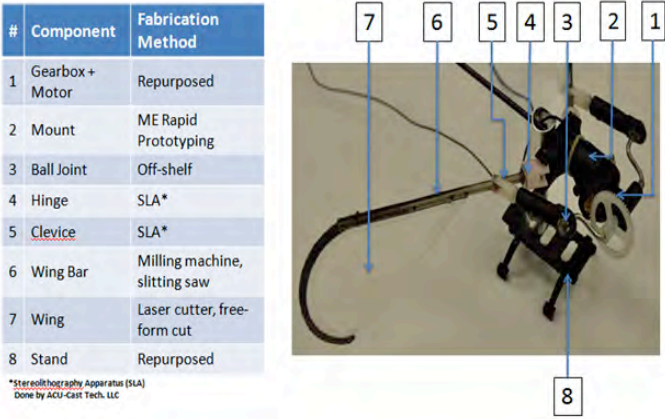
Figure showing all the parts and their fabrication method (the other wing is not shown in the picture)
